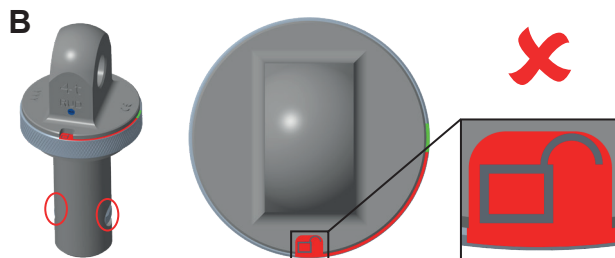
Symbol RED | LOCK OPEN = PIP-RAPIDO can be mounted/removed
